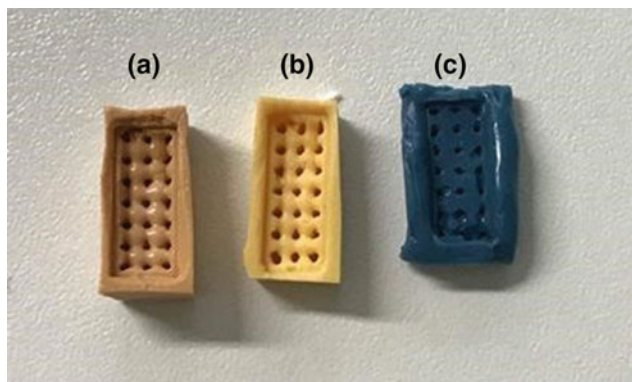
Type of molds a M1 mold, b M2 mold, c M3 mold
